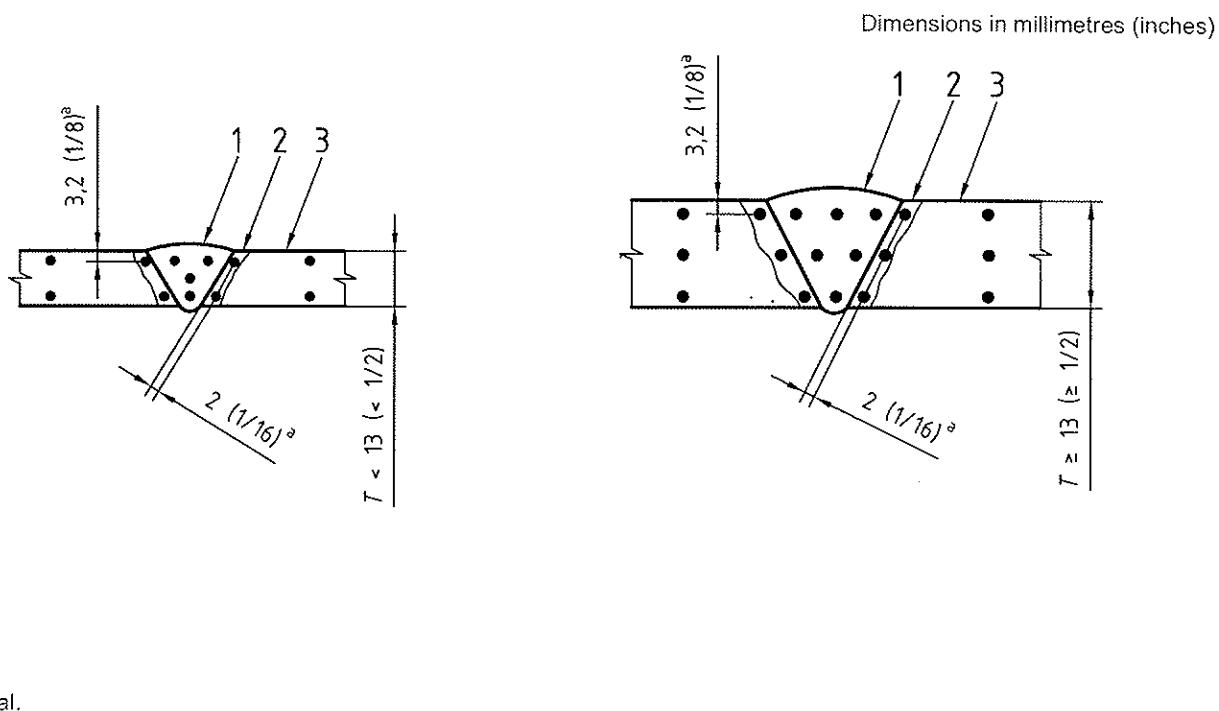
Welding procedure qualification — Rockwell hardness test locations (PSL 3)
